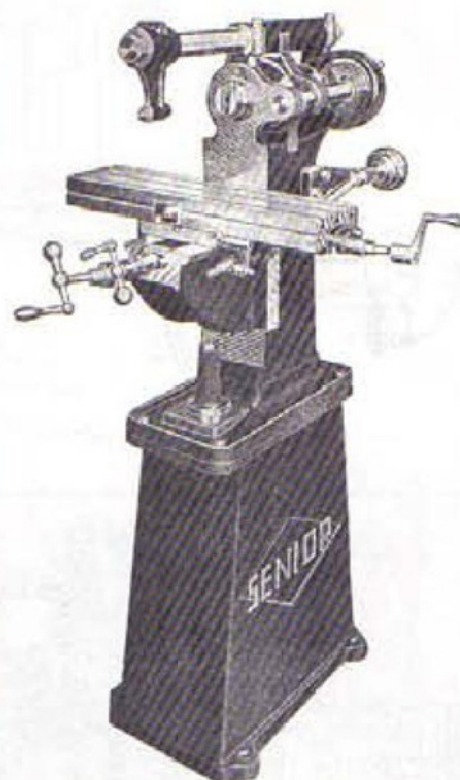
Horizontal milling machine, Tom Senior, 1939.
